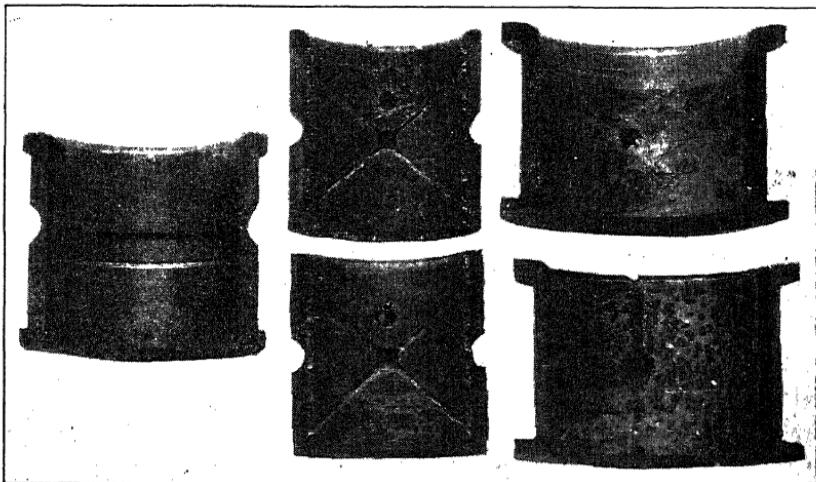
Burned Engine Bearings—One Unburned at the Left
